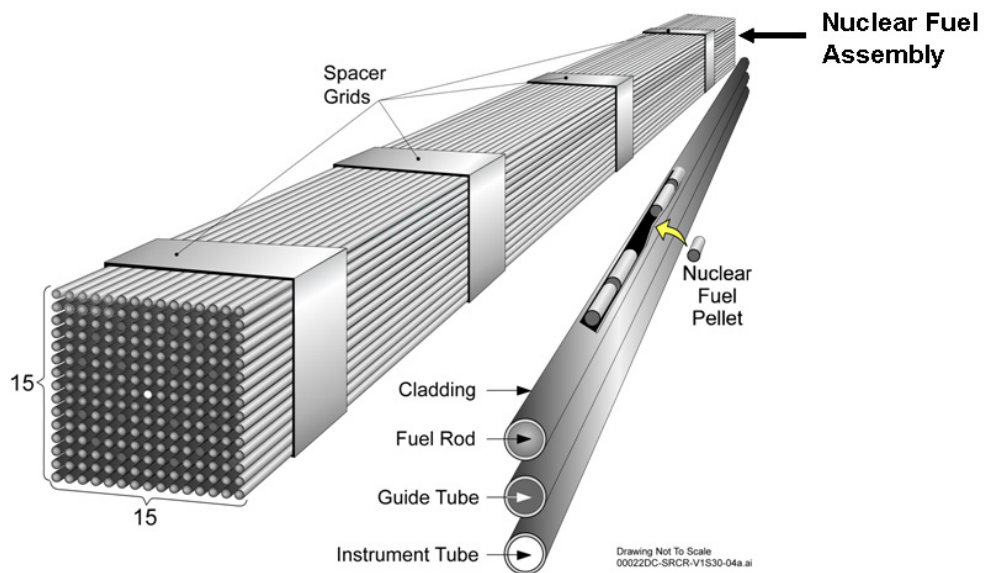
Components of a nuclear fuel assembly. From [92]
